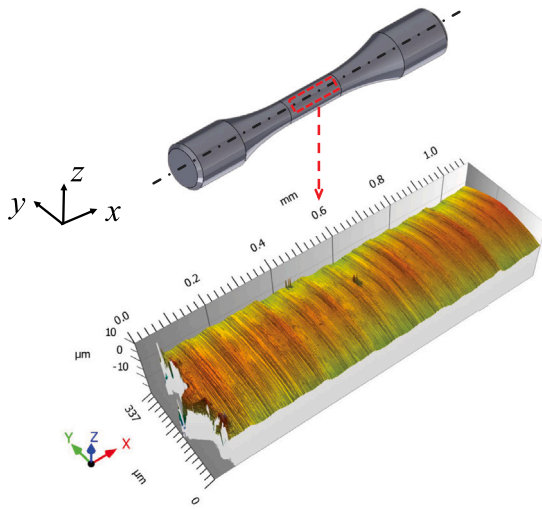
Surface acquisition of a machined cylindrical specimen.
